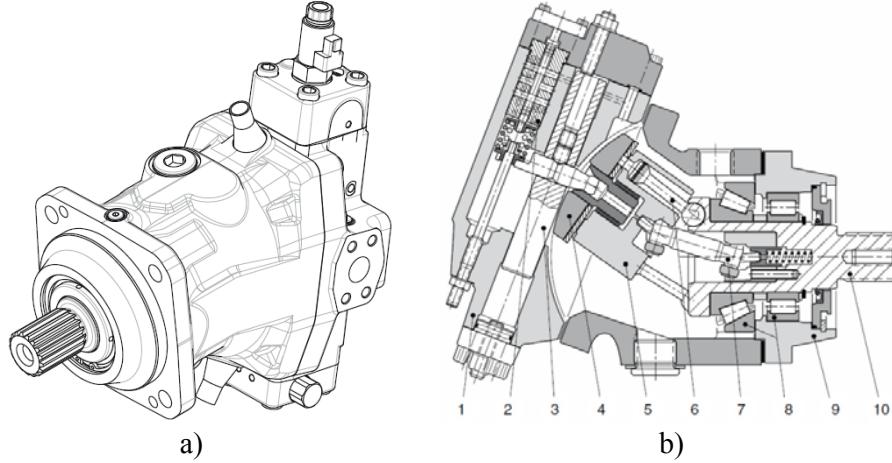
Bent axis variable displacement axial piston motors (TRIMOT):
